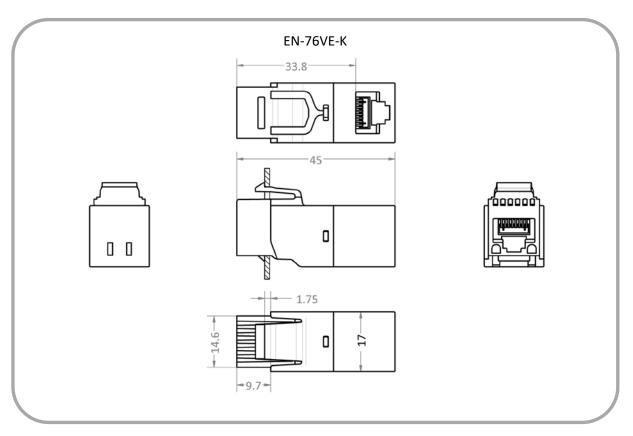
Technical drawings for EN-76VE-K. All dimensions are in millimetres.
